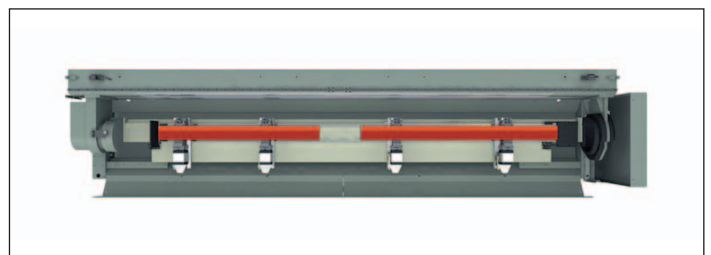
Multi-piece operating mode (max. 2 workpieces)
